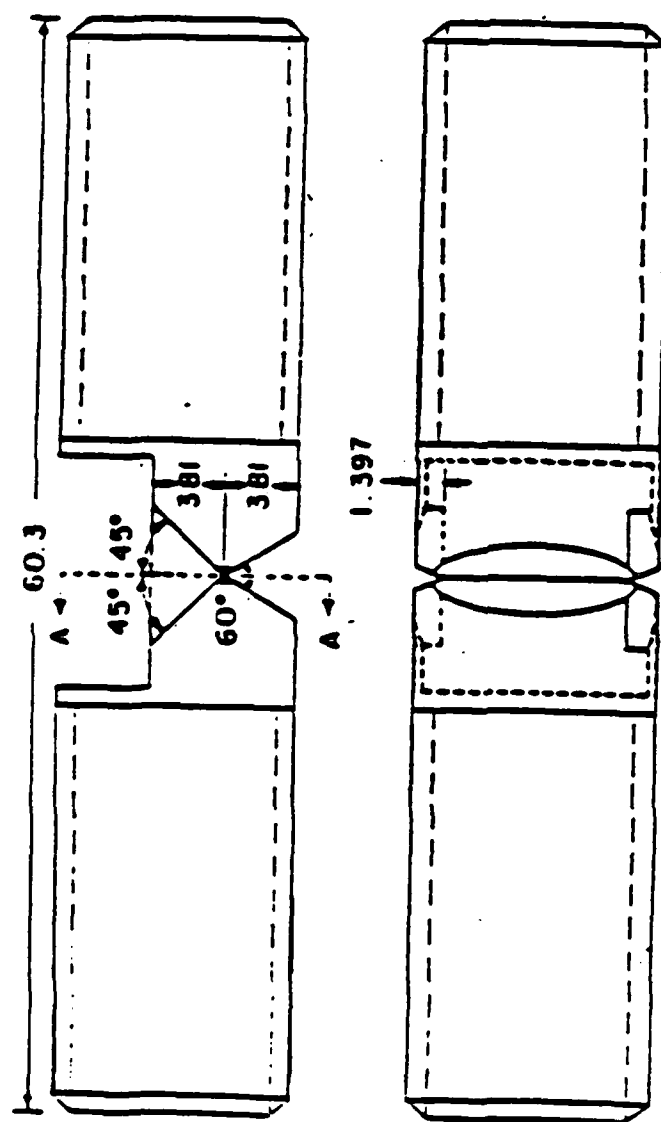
Second Machining (after fatigue precracking) for the Asymmetric Specimens; a is the fatigue crack
